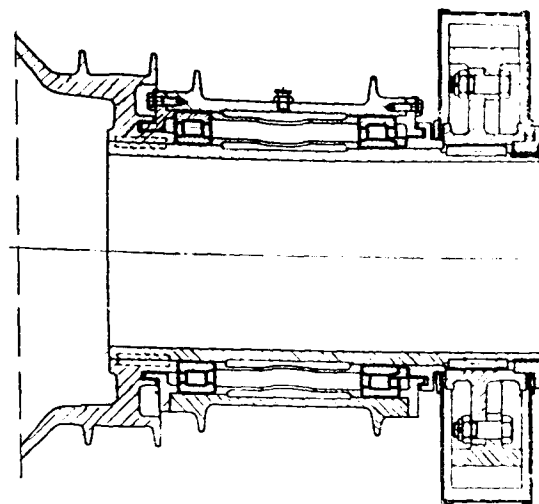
Roller Bearings fitted on hollow axle of electric rail car.
